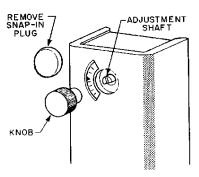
Drawing showing snap-in plug removed and the knob in line to assemble. Press the knob onto the slotted shaft.
